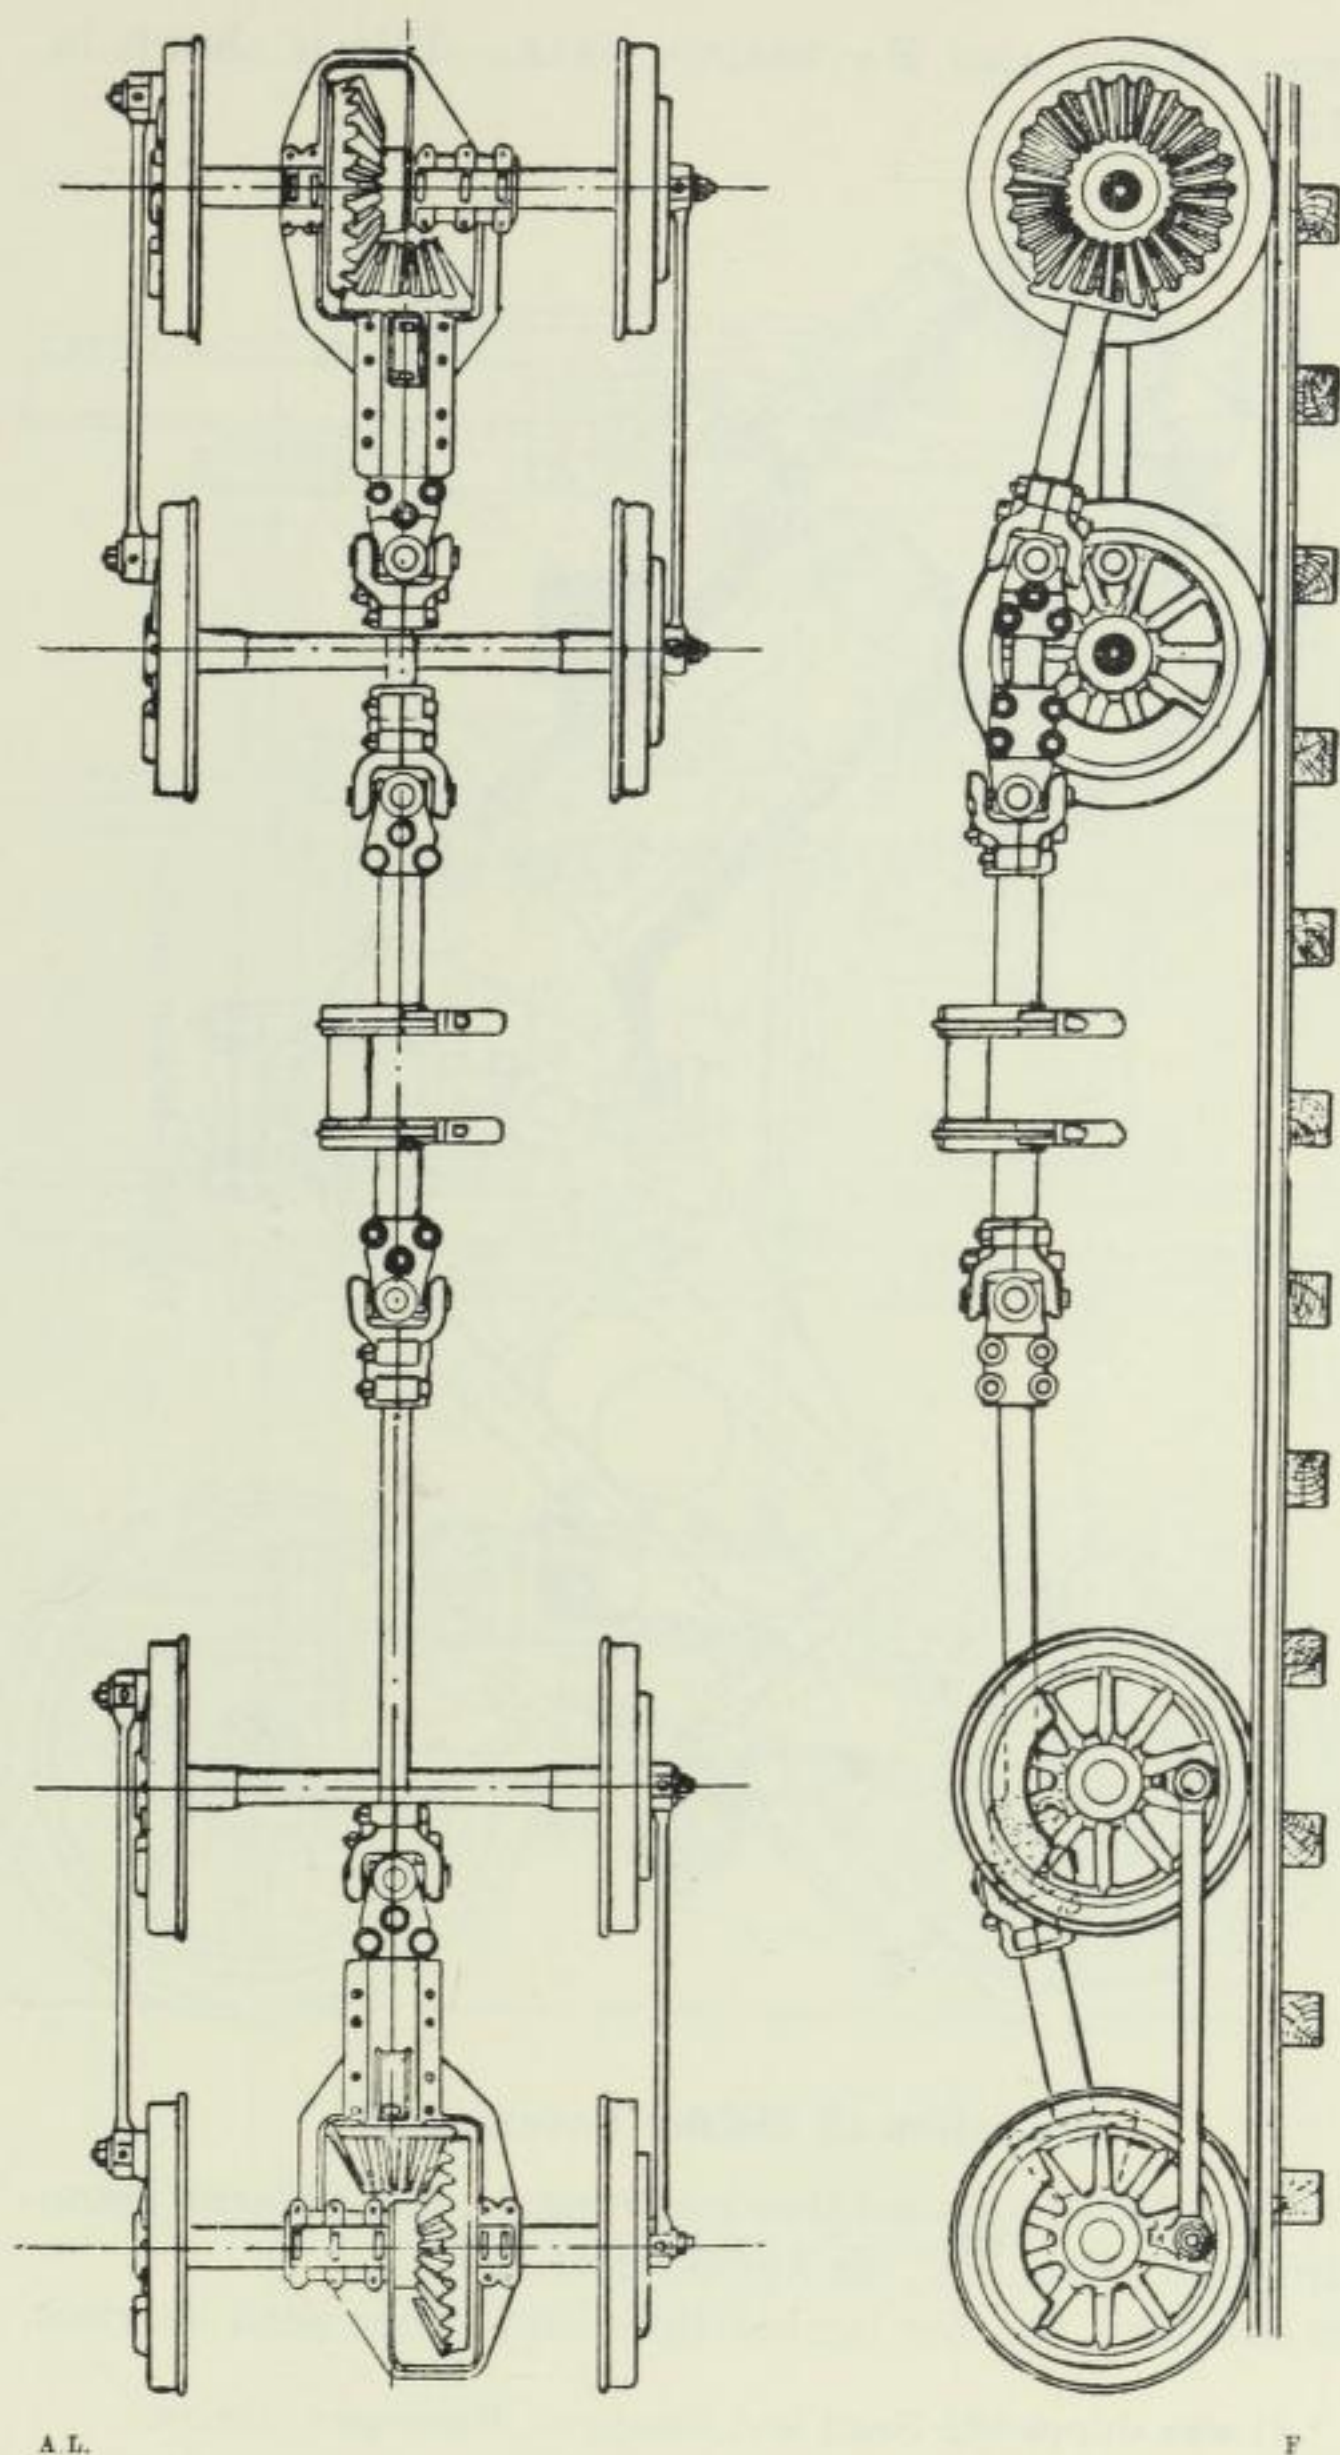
Main Shaft, Gearing and Trucks, Heisler Locomotive.
